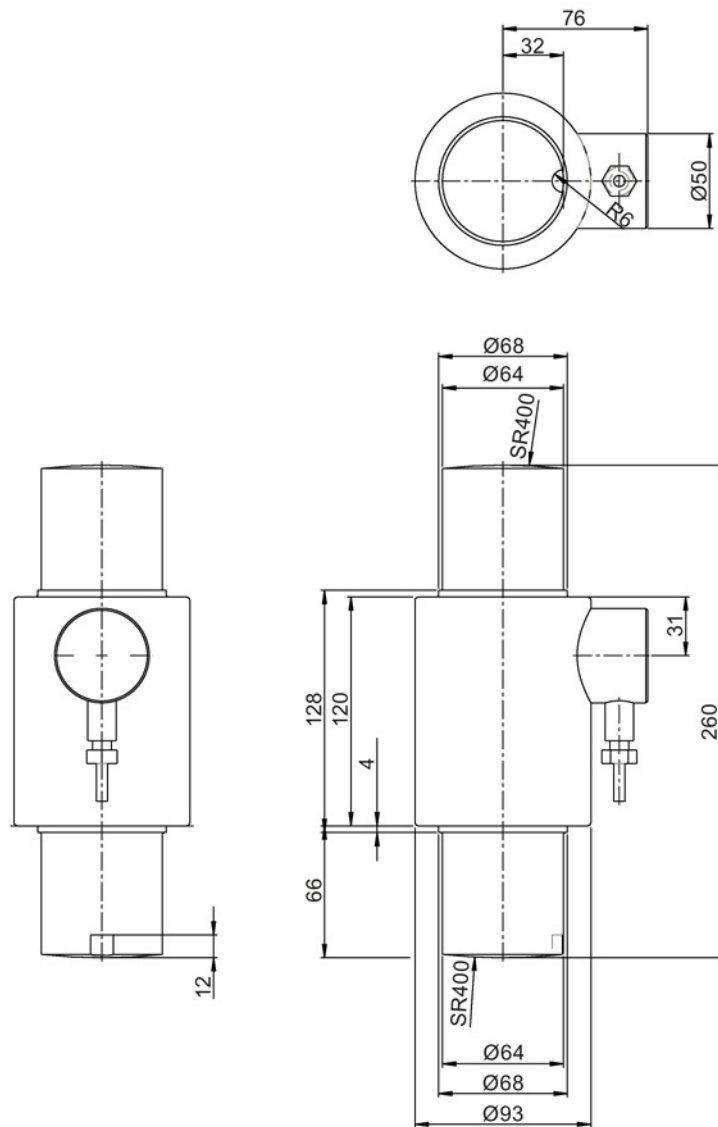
SIWAREX WL270 CP-S SB dimension drawing
